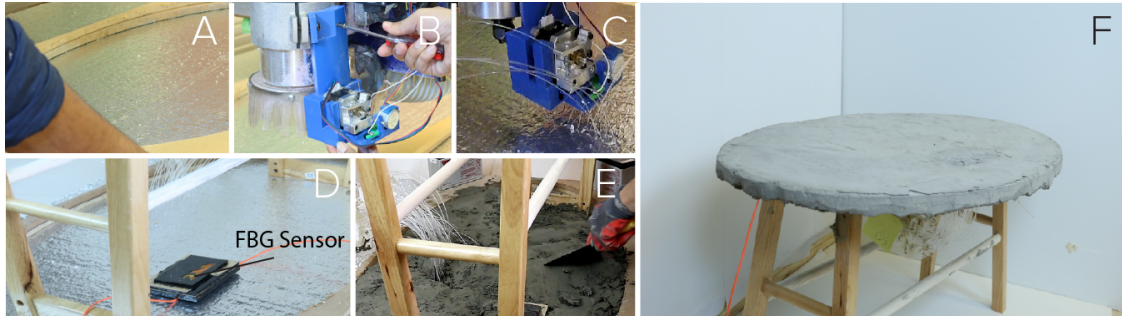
Fabrication Process for Active Cement Table including milling a mold using a CNC mill (A); attaching the fiber insertion hardware to the mill (B); inserting the optical fibers (C); placing the FBG Sensor (D) into the mold; casting cement into the mold (E); and the finished table (F).
